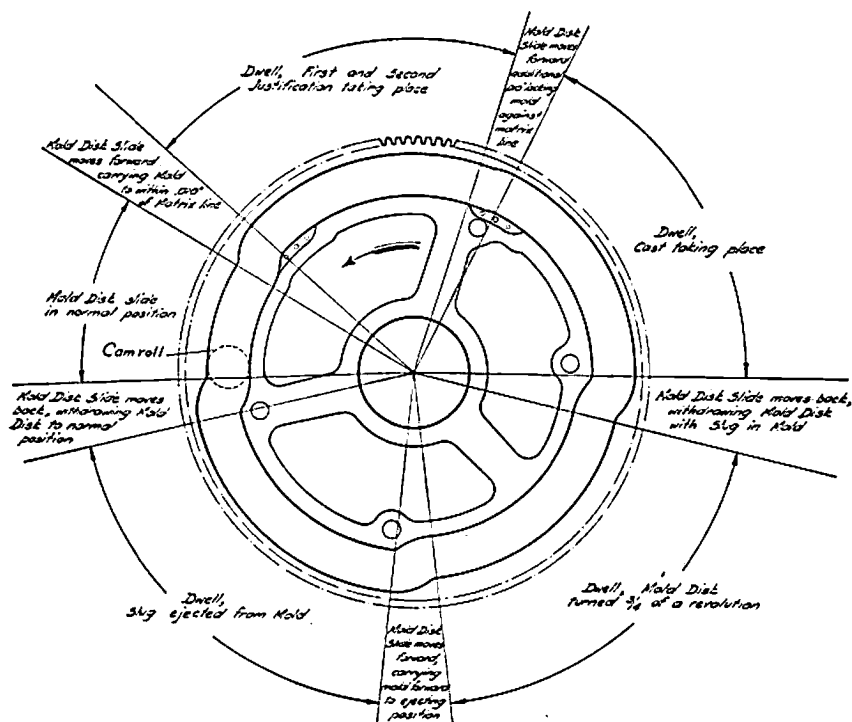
The Mold Cam and Driving Gear, showing the surfaces of the mold cam which promote the forward and backward movements of the mold disk and mold disk slide.
